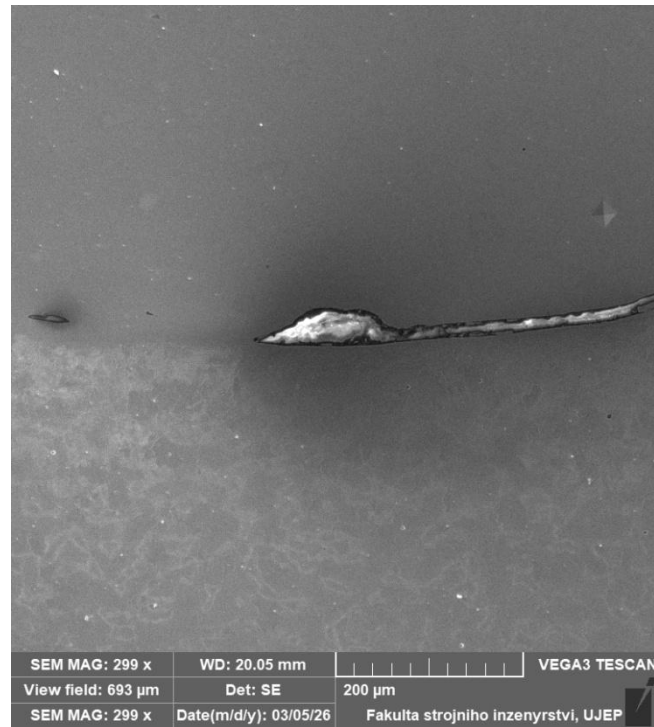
Defect at the interface of the weld joint – the defect is near the middle (axial part of the weld)).
